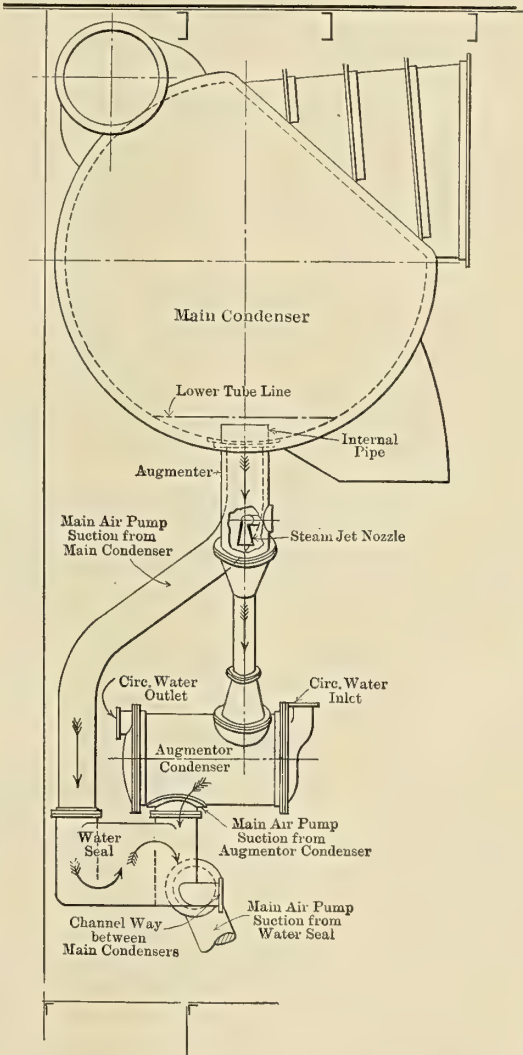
ARRANGEMENT OF VACUUM AUGMETER
